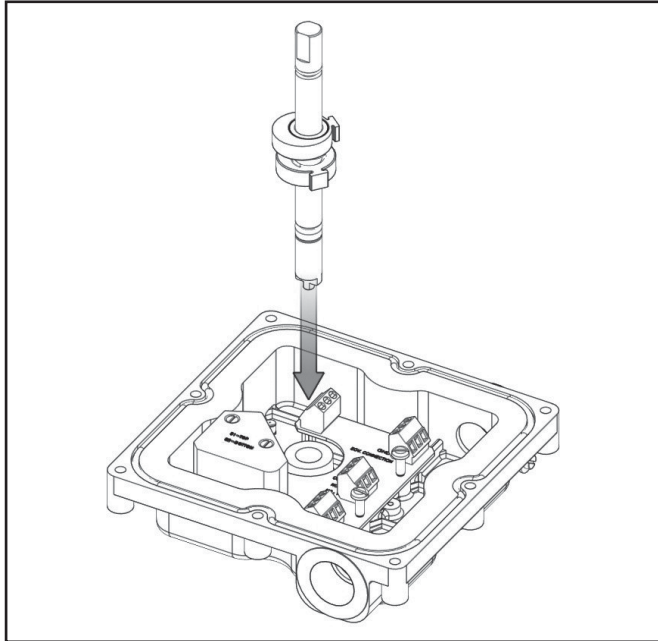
Inserting the operating rod to a device with 01, 11 switches
